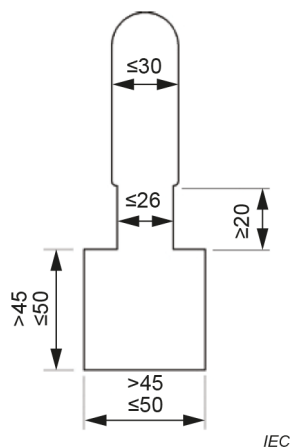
Example 2 – Opening sizes > 45 mm and ≤ 50 mm
